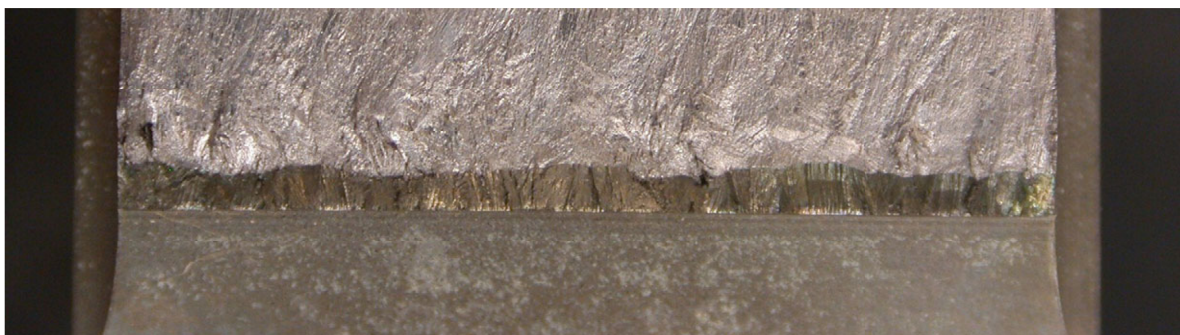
Macro photograph of CT-String defect specimen CTS 06. To achieve 20 ksi√in, the fatigue precrack length is quite short ( $a/W=0.420$ ), and the crack exposed to the test environment is the thin area just above the smooth machined notch. The specimen width is 0.5 inch.
